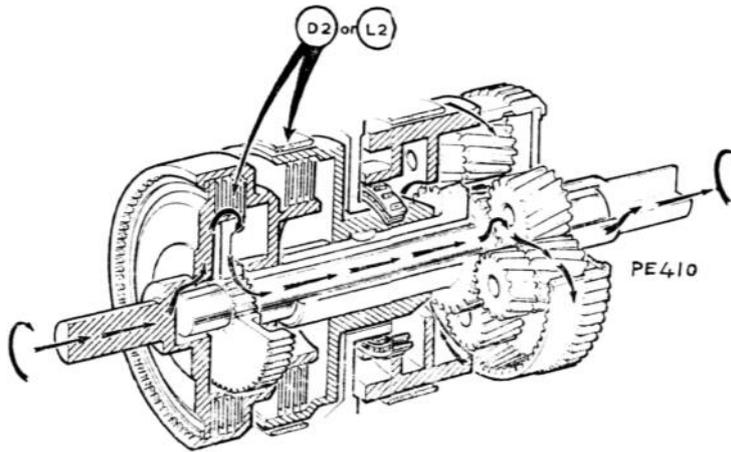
Alternative intermediate ratios: This drawing shows the clutch and gear combination in the second ratio of 1·45:1. With the lever in position 'L' this gear will be held at all speeds over 5 mph on closed throttle. In the 'D' position automatic gear changes will be made at:
